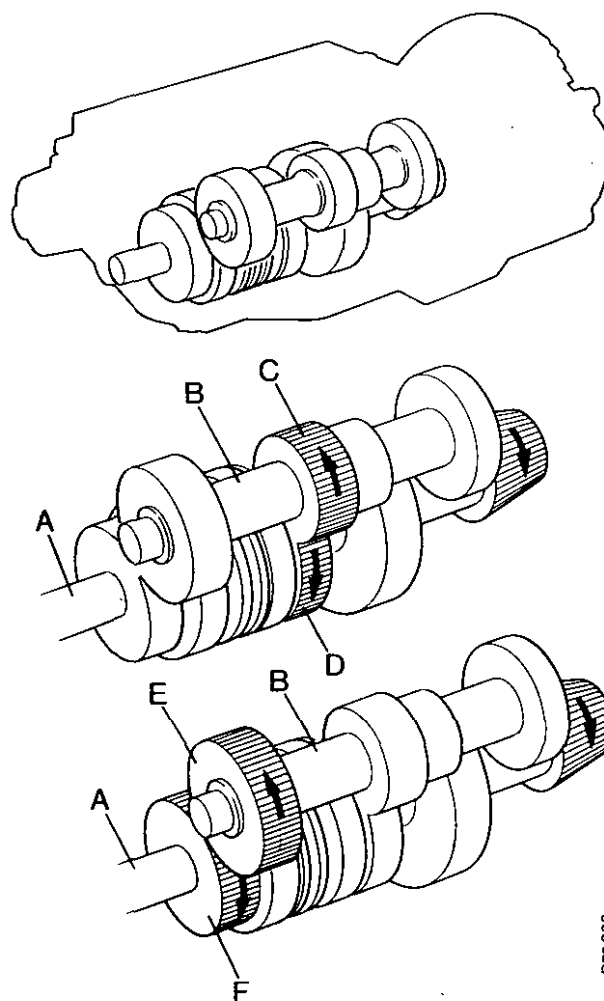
SECOND AND THIRD GEAR DRIVE TRAINS
